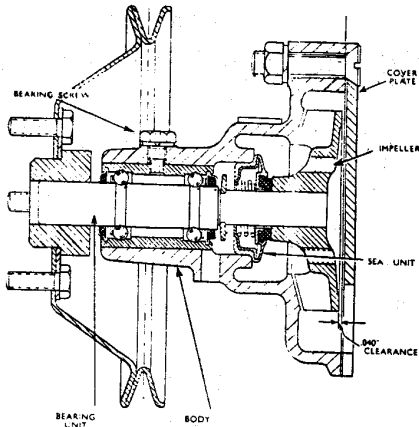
Shaft ball bearings are sealed at each end to keep lubricant in and water out of bearings. A spring - loaded seal (in color) is used to avoid water leakage around pump shaft. Note clearance between impeller and cover plate.
